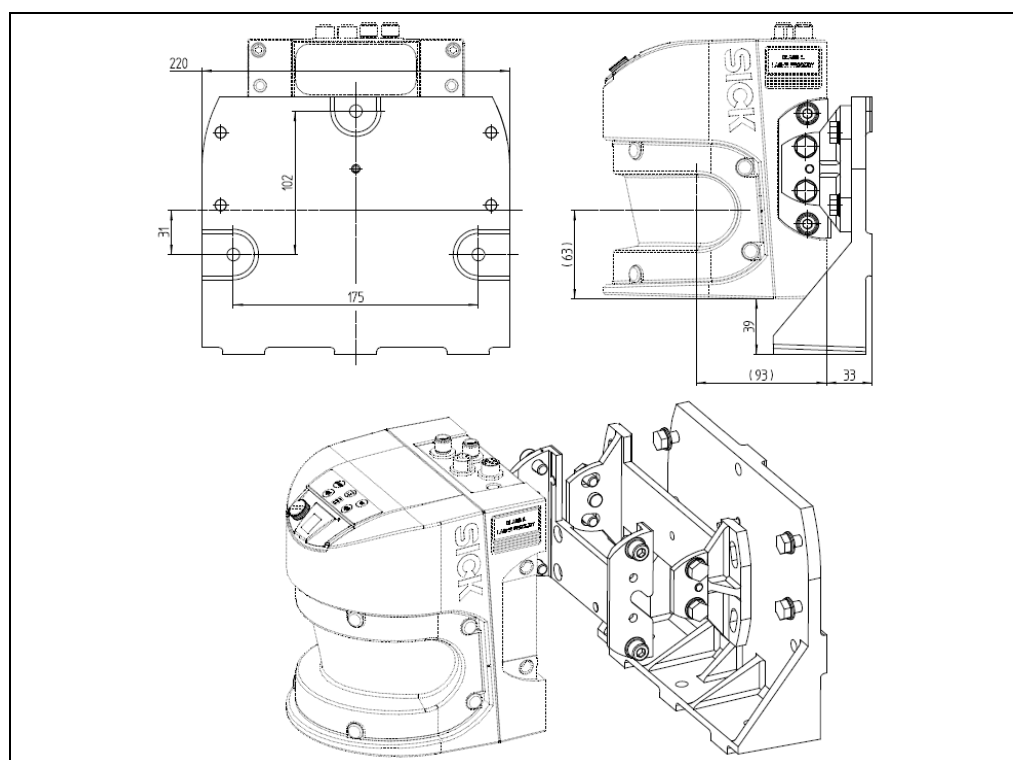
Dimensional drawings for the LMS511 SE with mounting kits 1, 2, and 3
